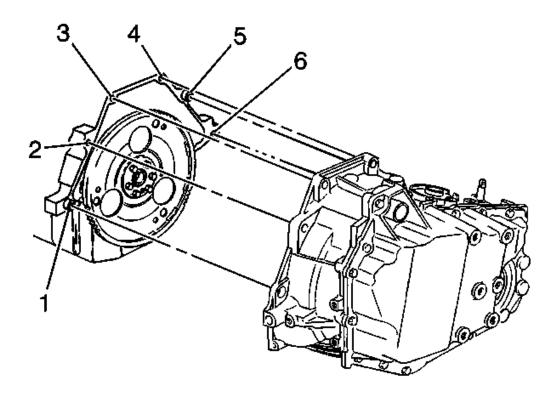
View of Transaxle To Engine Mounting Courtesy of GENERAL MOTORS CORP.
